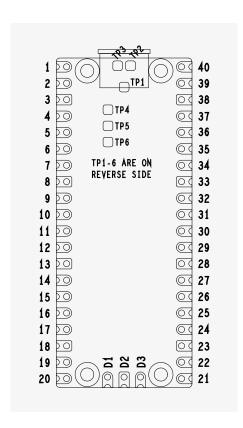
The dimensions of the Raspberry Pi Pico Rev3 board.
